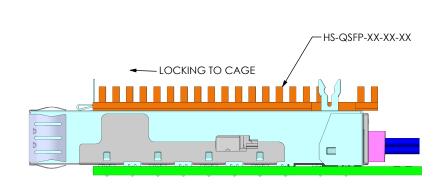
PRESS AND LOCK HEATSINK TO CAGE
